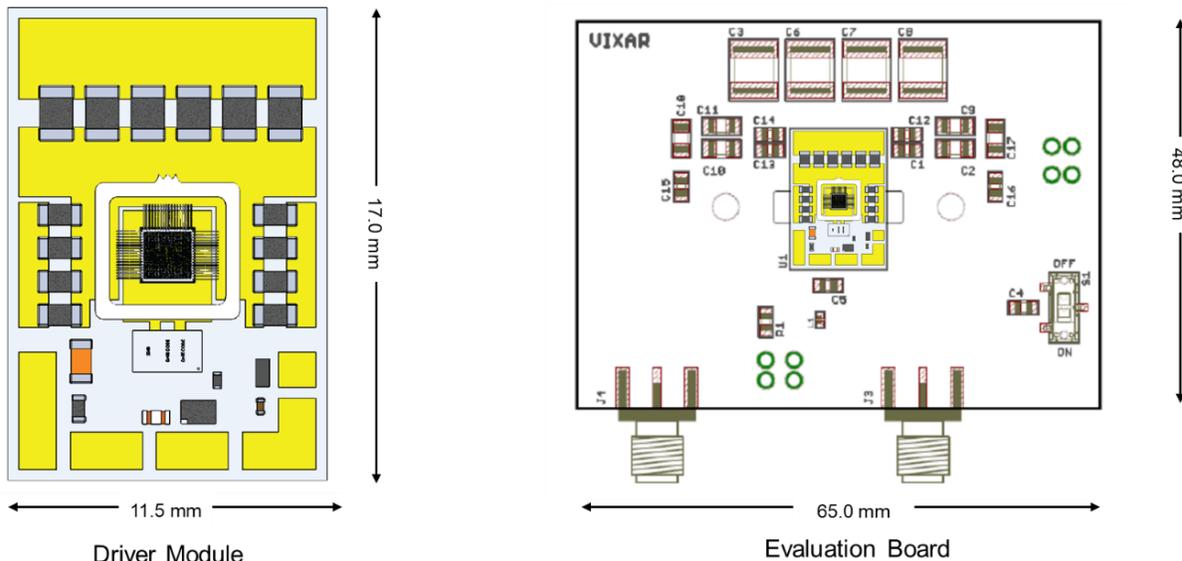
Vixar driver module (left) and evaluation mother board (right).
